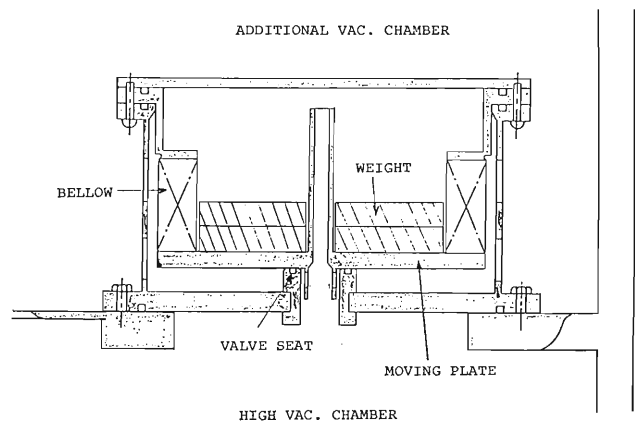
Sketch of a model of the weight loaded safety valve equipped between high vacuum chamber and the additional chamber. The valve seat is pressed by the weight in the moving housing; elasticity of the welded bellows does not play an essential role, because the elastic strength is usually decreased slightly with time.
